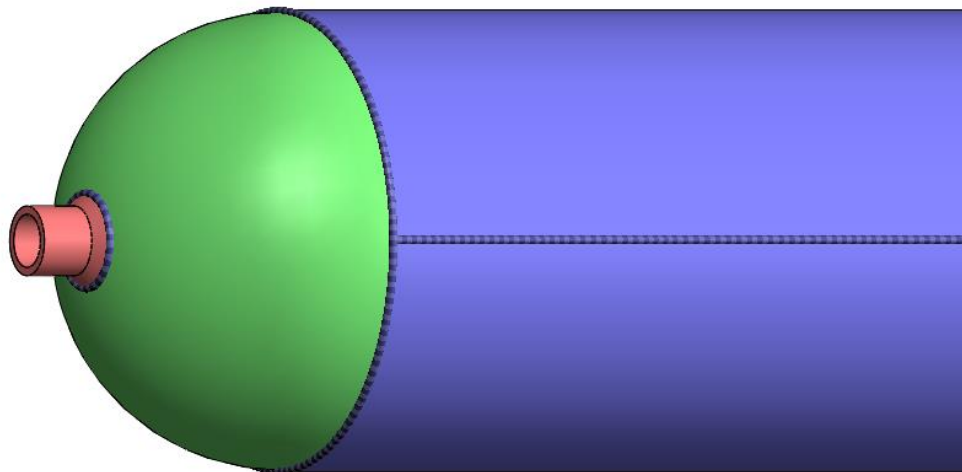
The tank is fabricated from 5 components: a cylinder (blue), 2 spherical ends (green, one shown), and 2 fittings (red, one shown). The components are joined by gas-tungsten arc welding. Four circumferential welds are used - the longitudinal weld shown here is from an earlier revision of the design.
